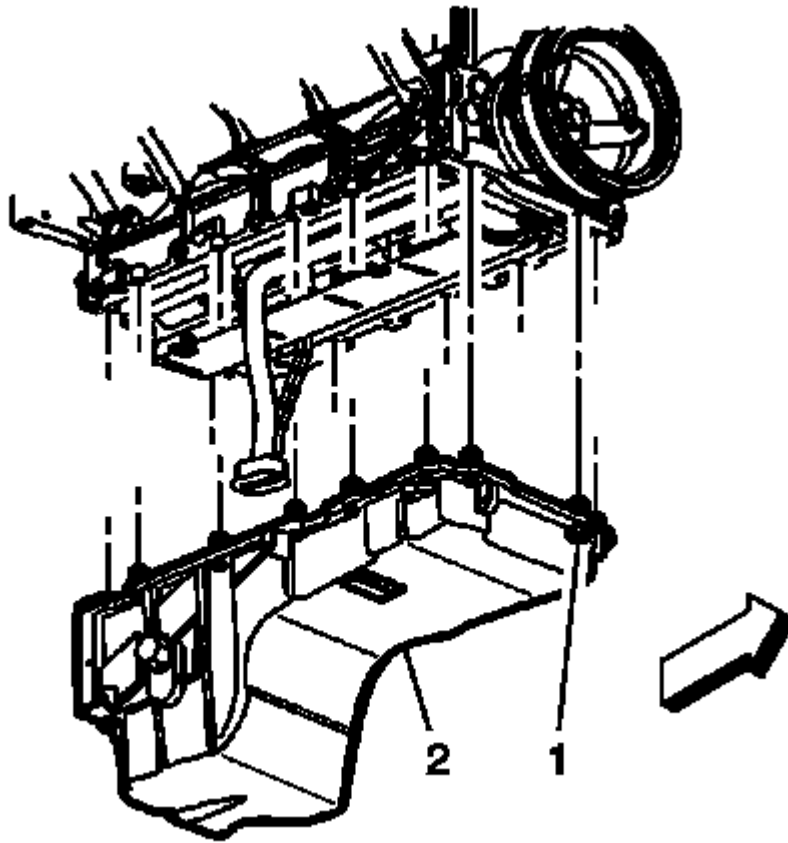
View Of Sealant Applied To Front Oil Pan-To-Engine Block Junction
